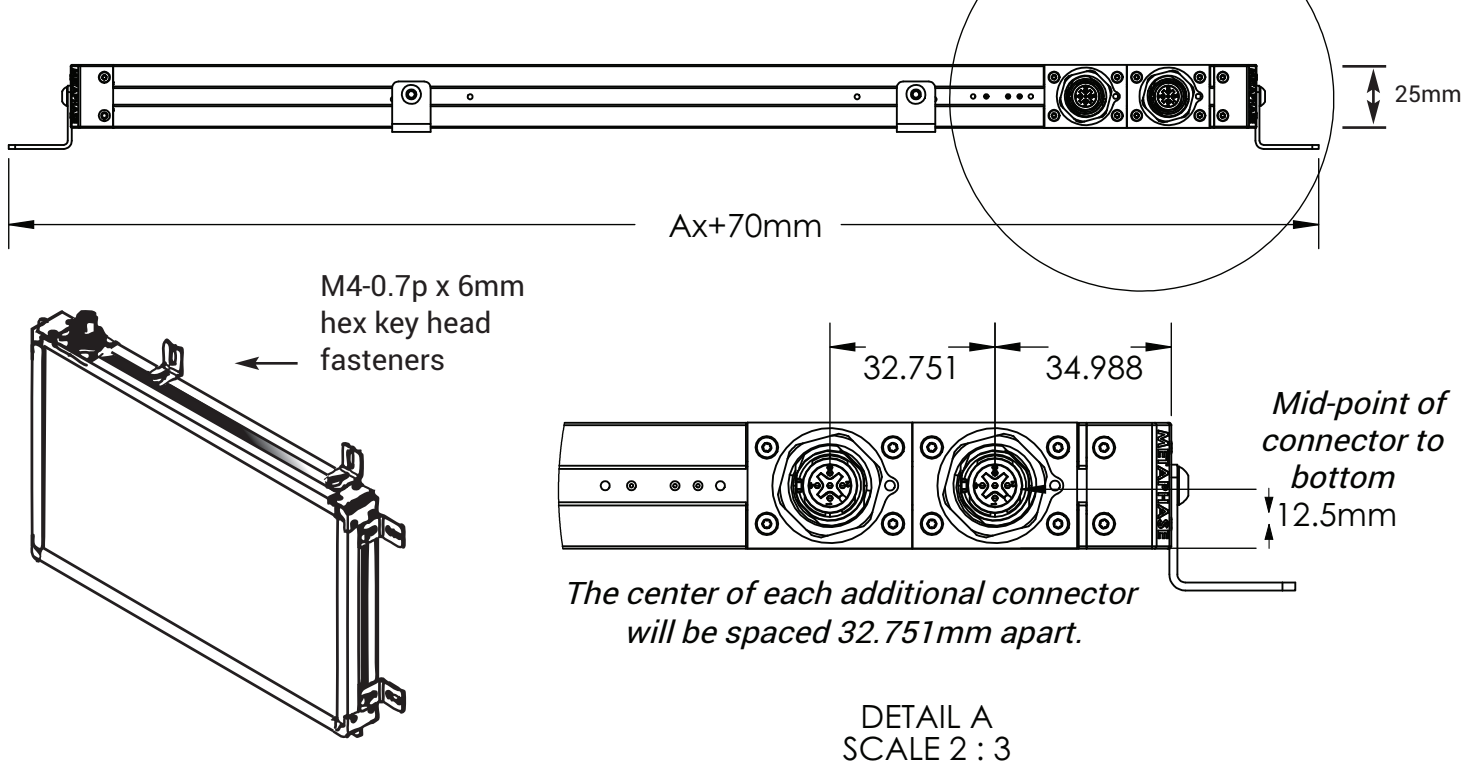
TXBL / TXCBL DIMENSIONS SIDE VIEW
